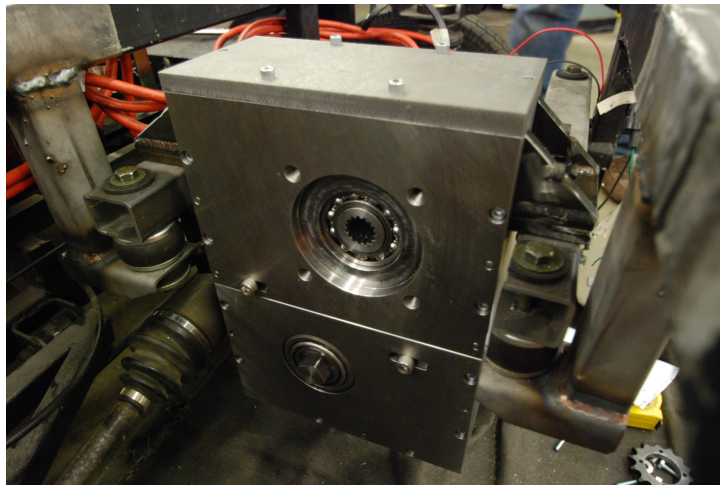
Gear Reduction Case Fully Integrated onto Vehicle
